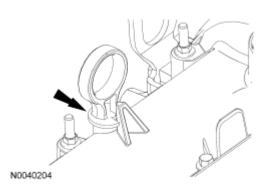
Locating Oil Level Indicator Courtesy of FORD MOTOR CO.
